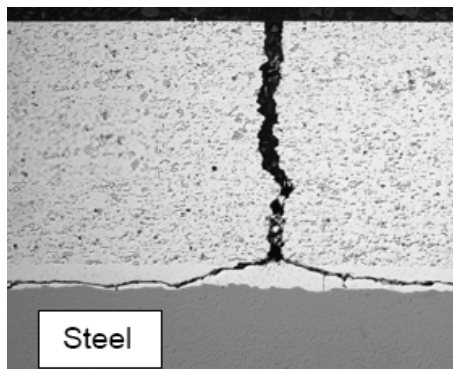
Fracture of magistral type (in cross-section of the bearing surface layer) for the lining made of AlSn20 alloy (magnified 100x)
